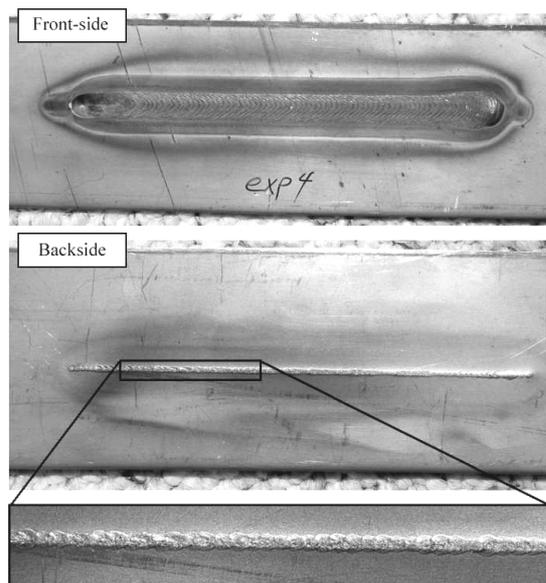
Weld Images (Front View, Backside View, and Zoomed View of Backside)
